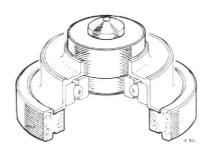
Pot fixture T.79106 and adapter T.74292 for pressing front bearing out of its housing.
